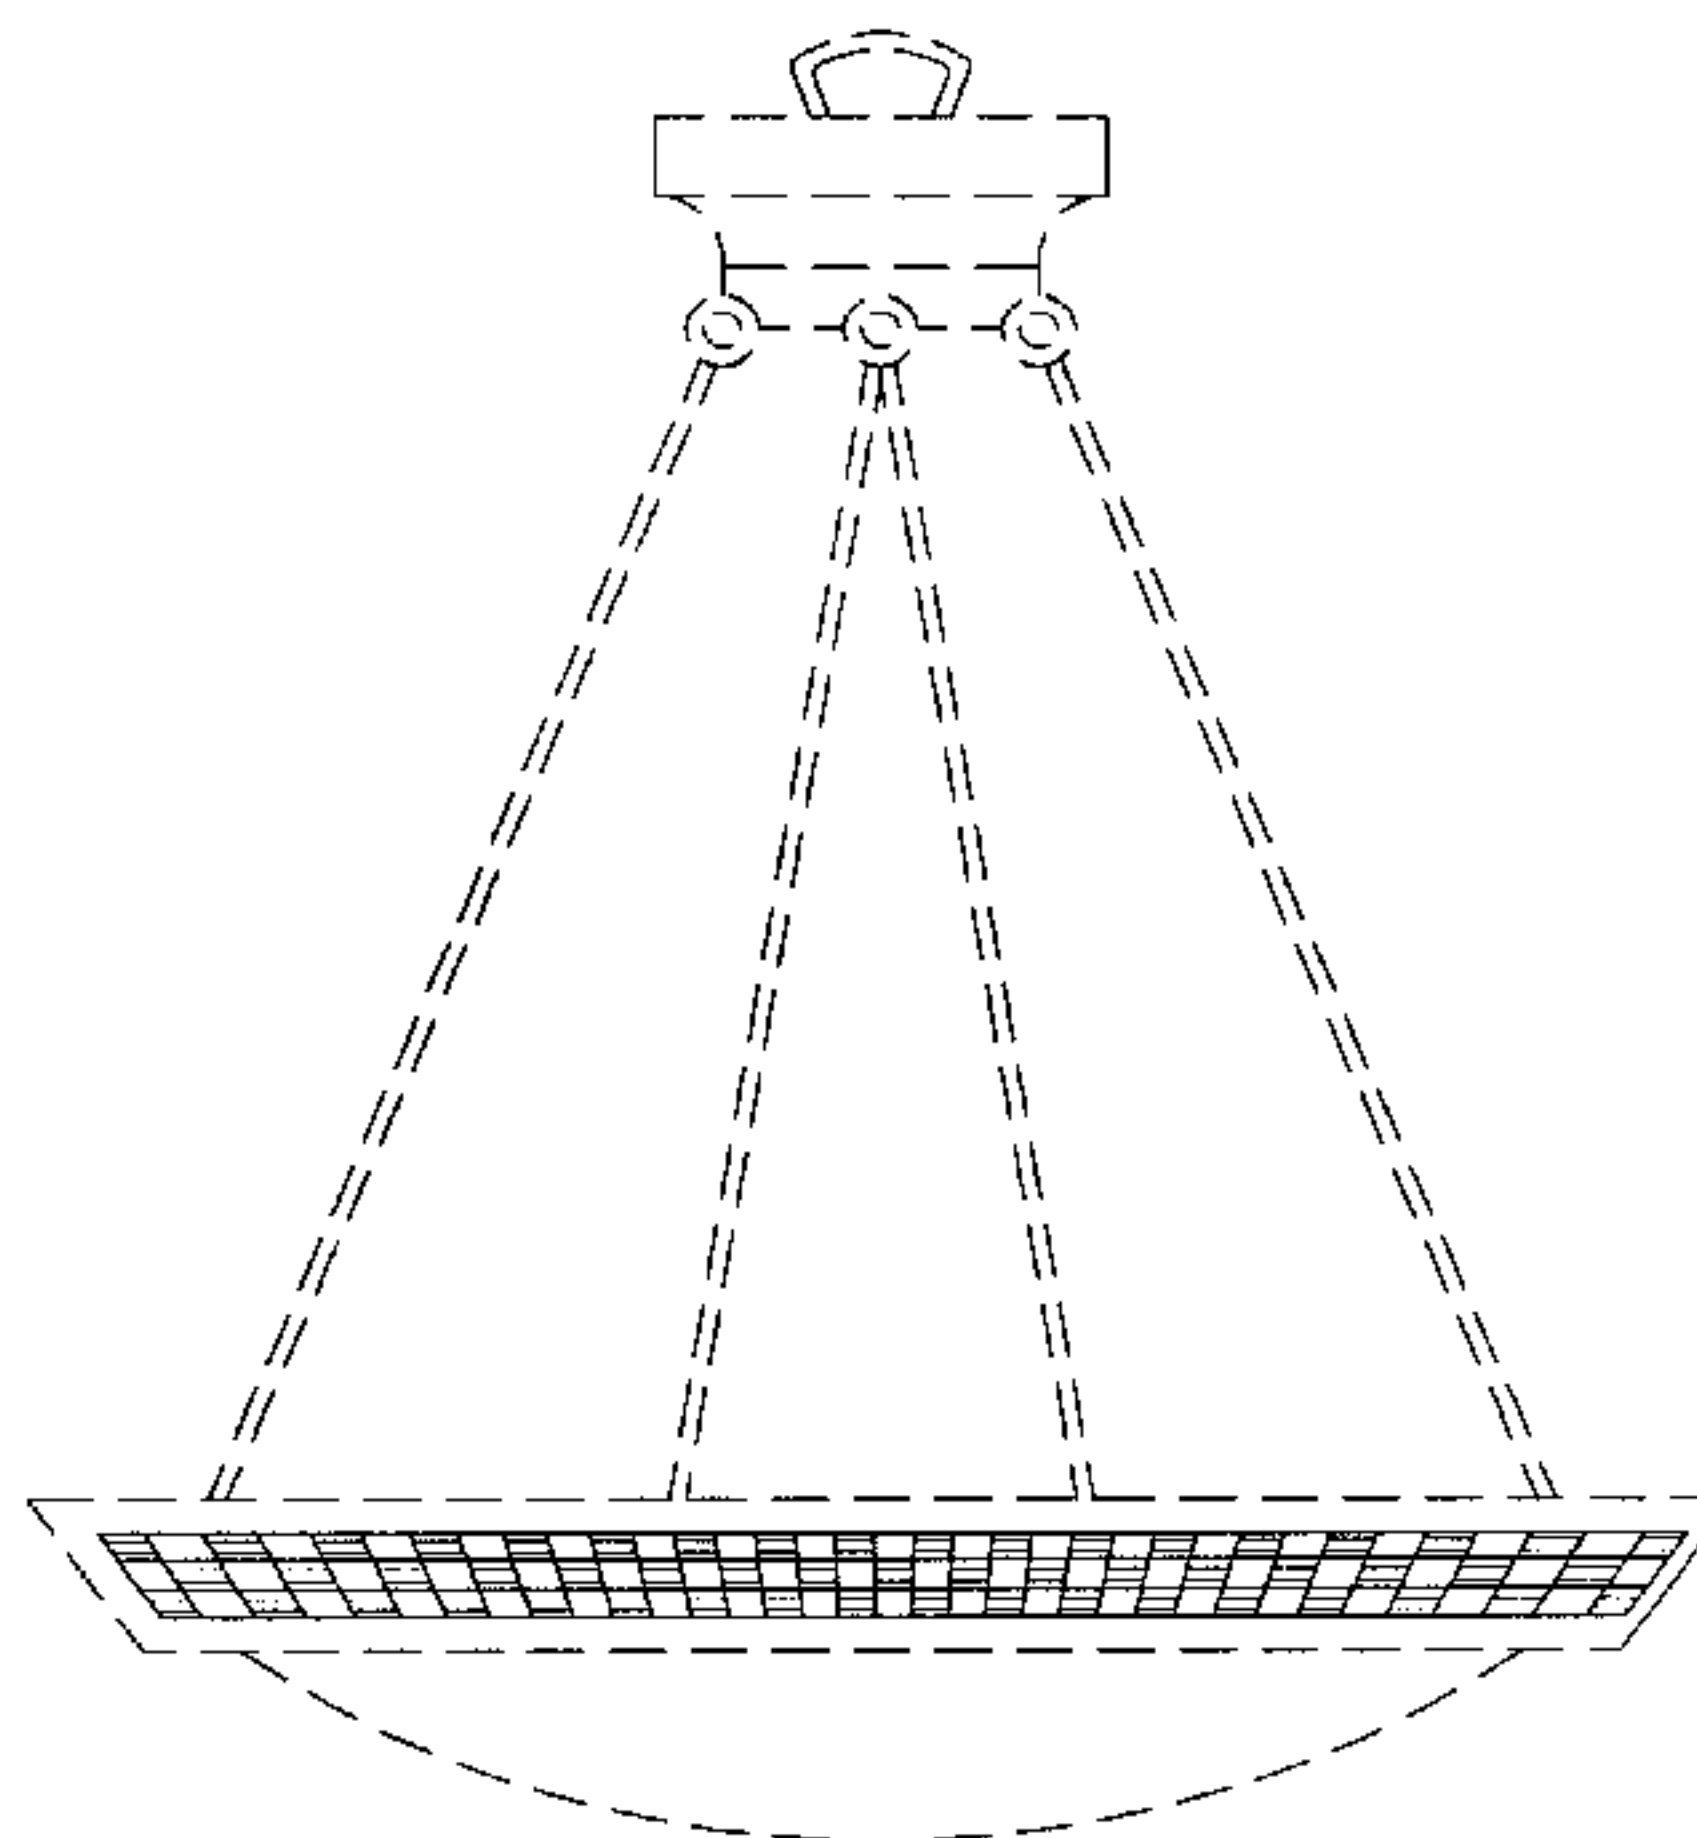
is a reduced-scale bottom perspective view of the metal mesh design for lighting fixtures showing a tenth application of my new design;
